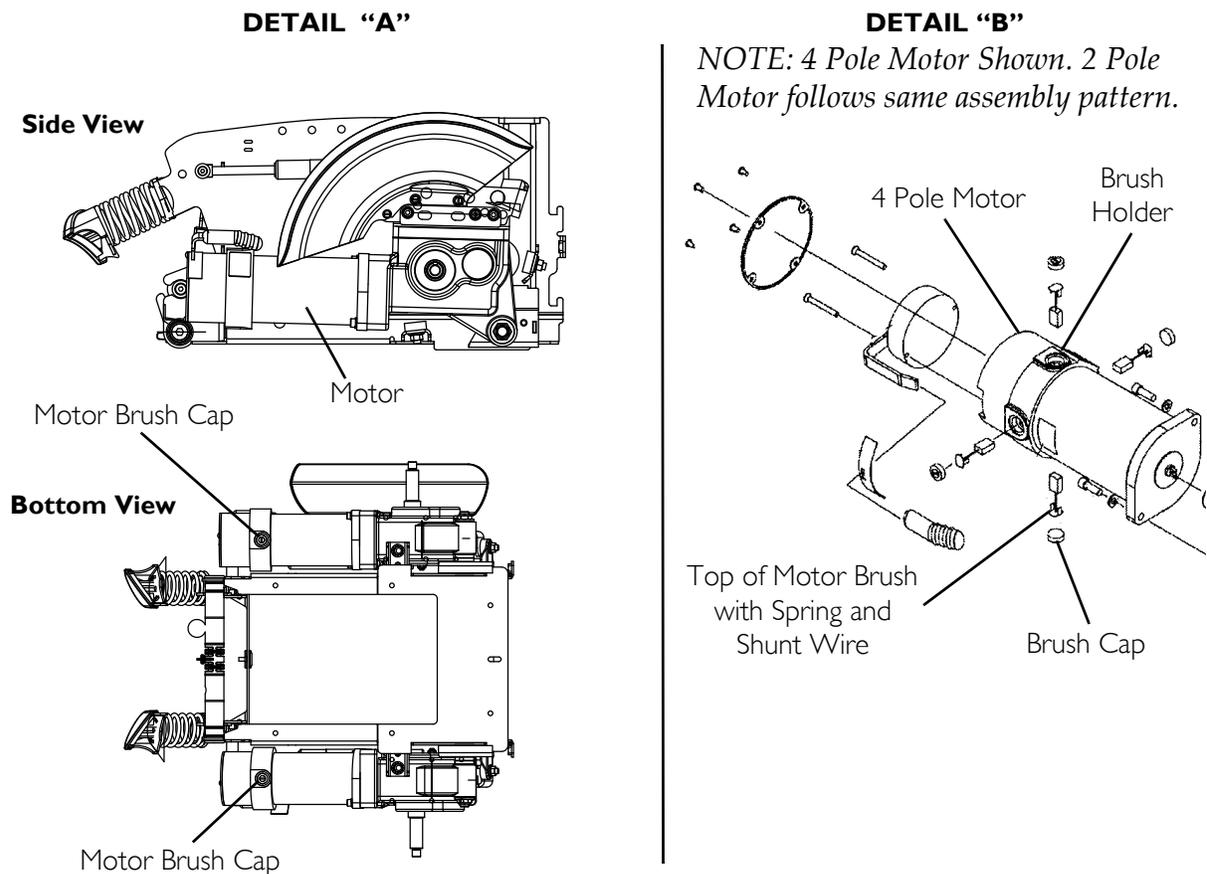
Motor Brush Inspection and/or Replacement
